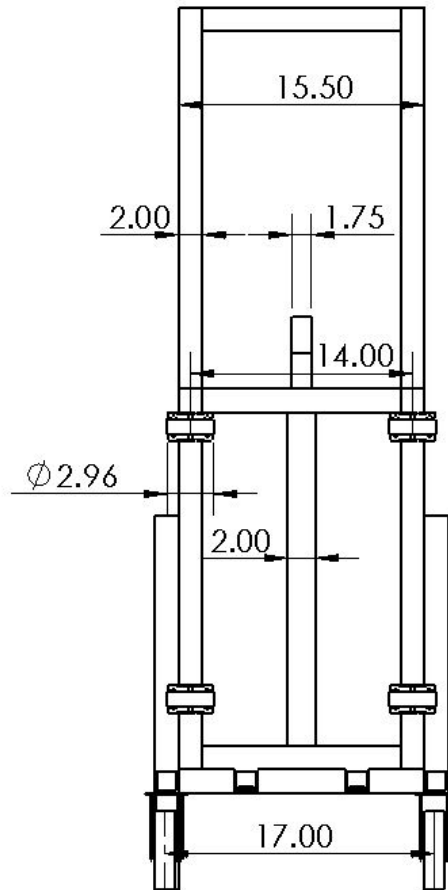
FRONT VIEW OF HANDTRUCK WITH DIMENSIONS (INCHES).
